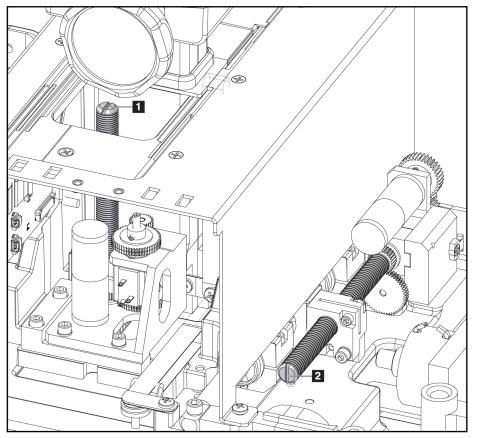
Y-axis assembly drive screw (1), X-axis assembly drive screw (2)
